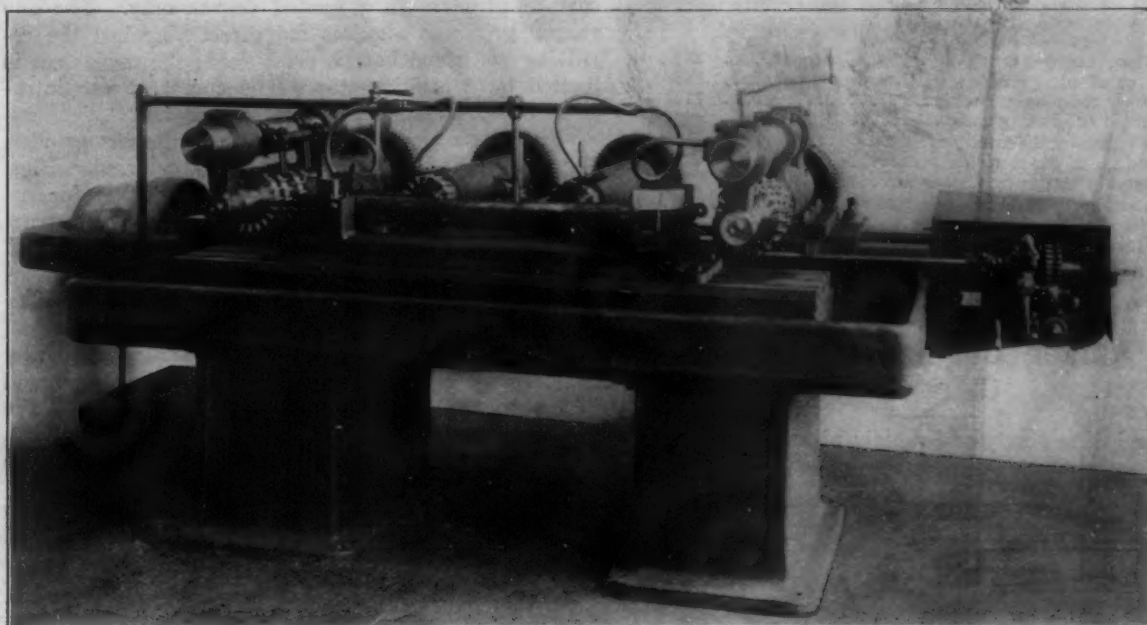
A Special Beaman & Smith Machine for Milling the Front Axles of Automobiles.
